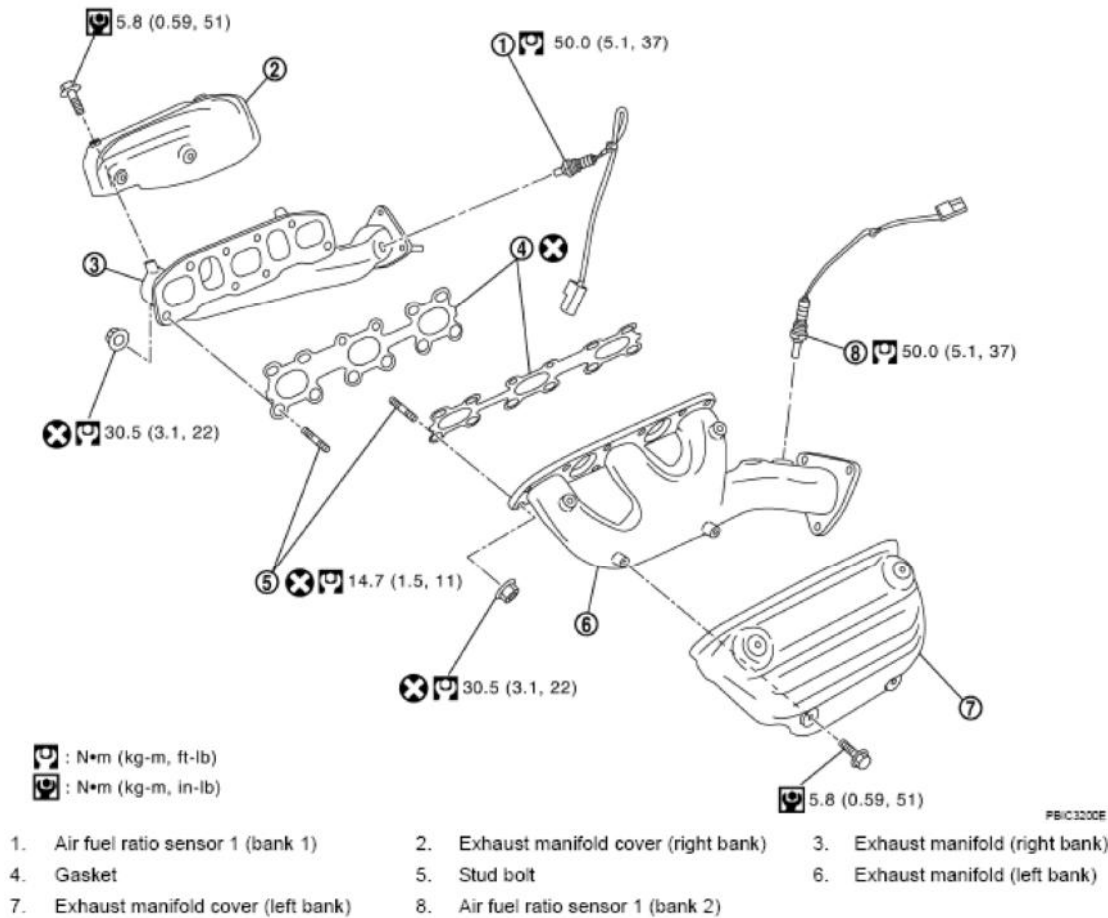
Identifying Exhaust Manifold Components With Torque Specifications
